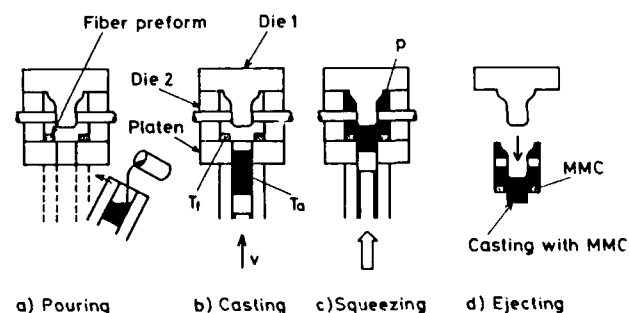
Indirect squeeze casting operations with a vertical type of machine.
